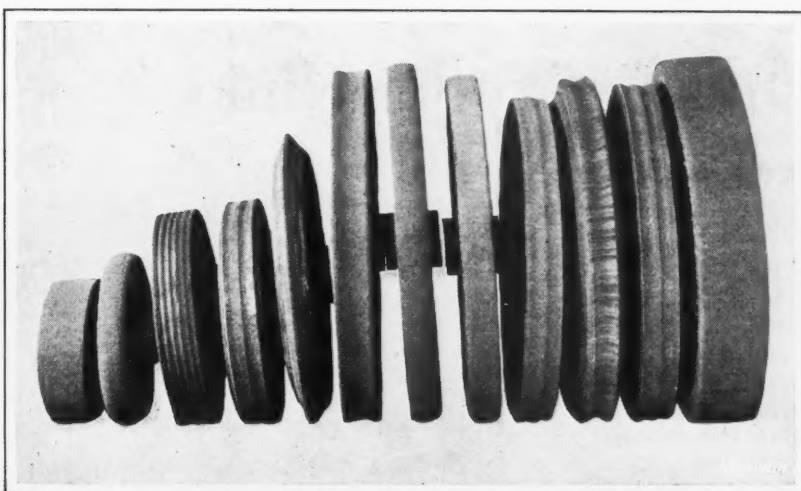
Types of Wheels used in polishing Rifle and Pistol Parts
